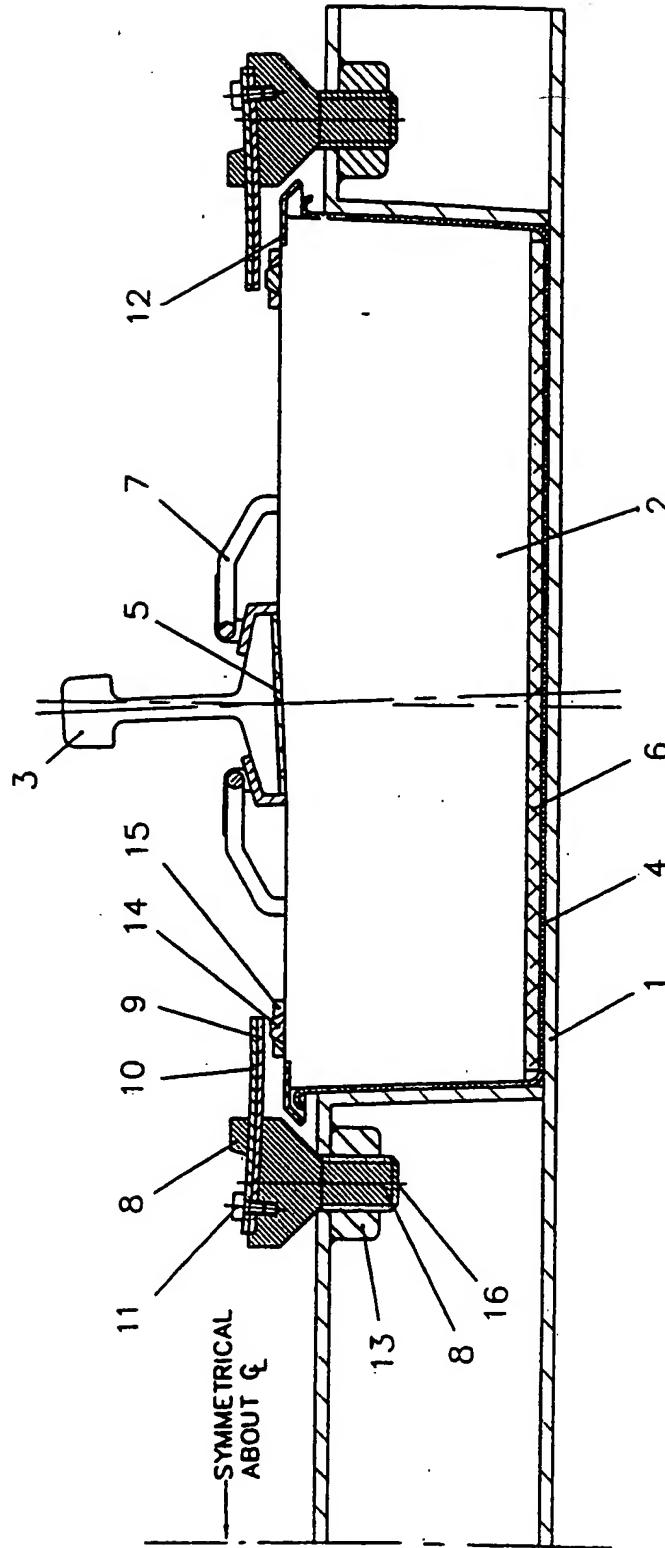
DETAIL OF SECTION I - I SHOWING BLOCK RETAINER OF F i g. 1
